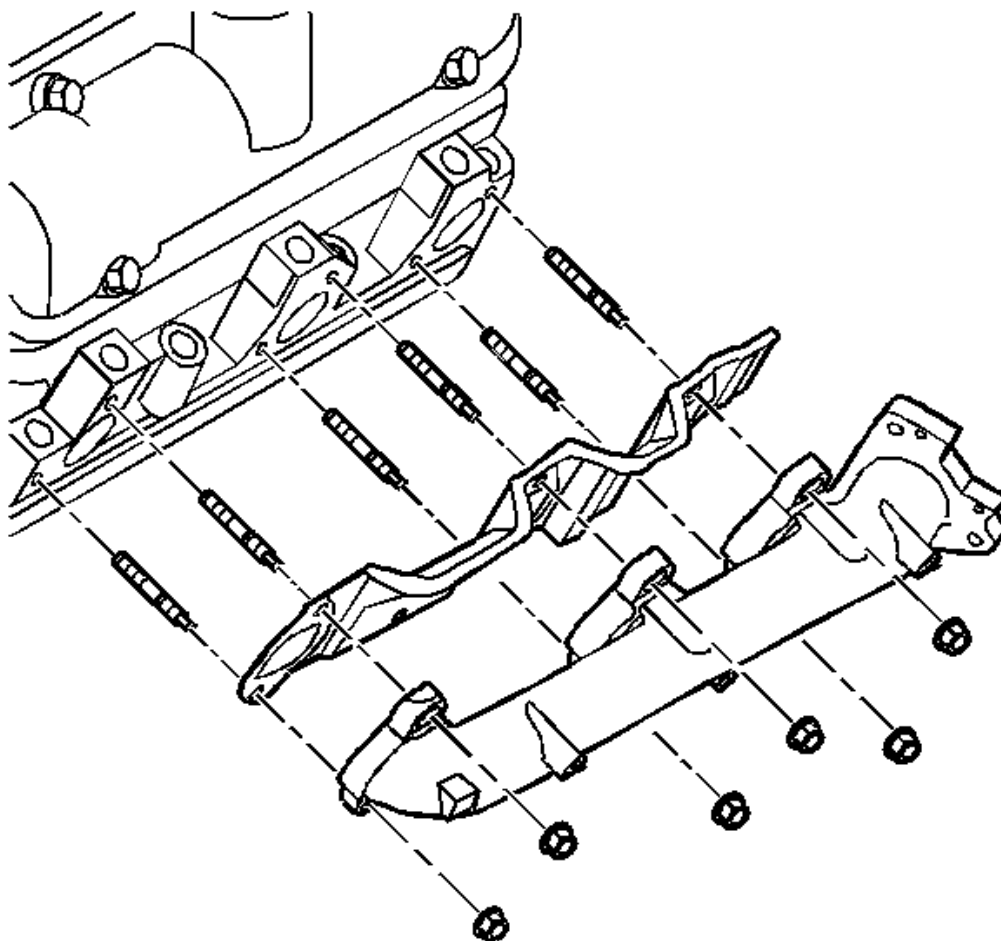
View Of Exhaust Manifold & Exhaust Manifold Gasket - Left
